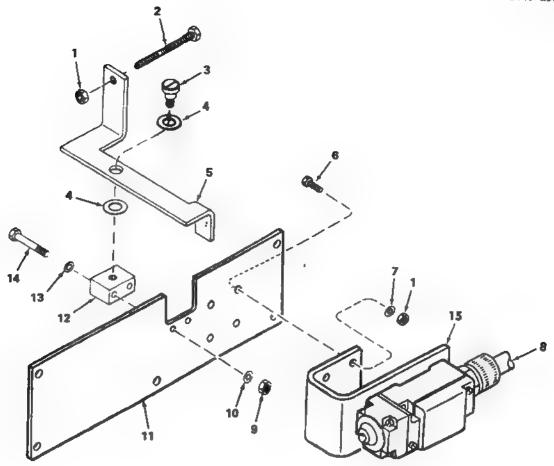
ELECTRICAL INSTALLATION, LAUNCHING RAIL /8167172/
